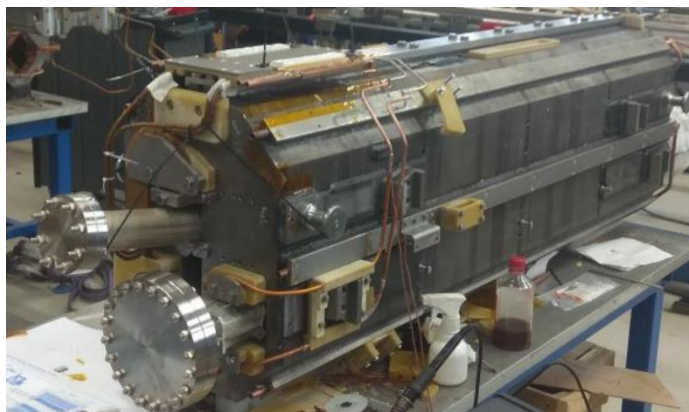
Assembling of Lambertson magnets at VBLHEP line for assembly and test of superconducting magnets.
